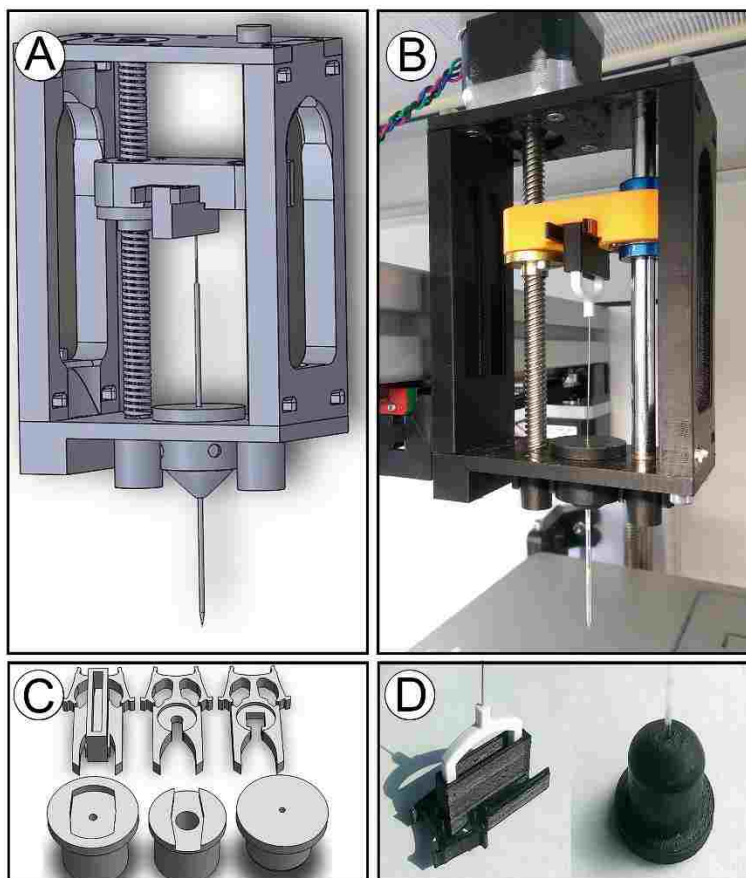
CAD design and 3D printing of bioprinter modifications to the Felix 3.0. (a) CAD model of x-axis bioprinting adapter with lead screw and syringe adapter for injector depression. (b) Resultant 3D-printed bioprinter injector adaptor mounted to the X-axis of 3D printer with stepper motor installed for injector actuation. (c) CAD models for syringe adapter inserts for securing the body of the injector (bottom row) and clips for holding the plunger (top row). (d) Example of a 3D printed insert and clip used with the pulled glass-microcapillary pipette injector and teflon plunger.
